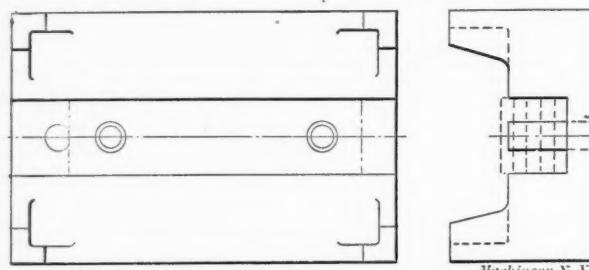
Form of Jig which may be used for drilling a Number of Pieces Simultaneously.
